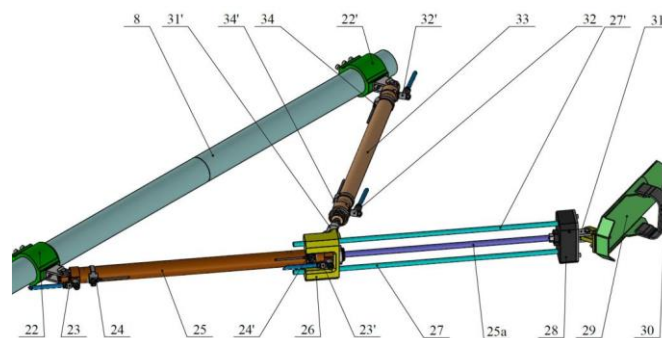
Perspective view of the handling system, highlighting the elements of the upper subassembly
